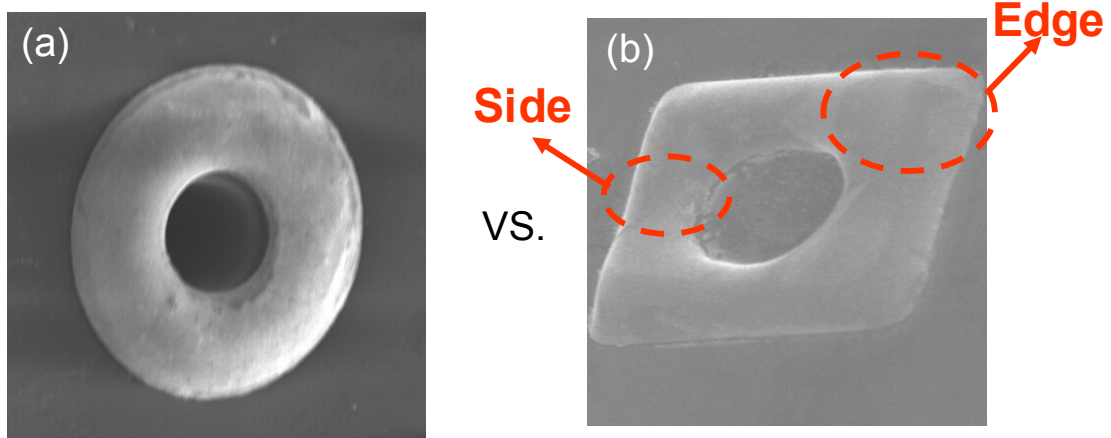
Feature Height Uniformity Shape Dependence – (a) circular solder fluidic I/O and (b) square-like solder fluidic I/O.
